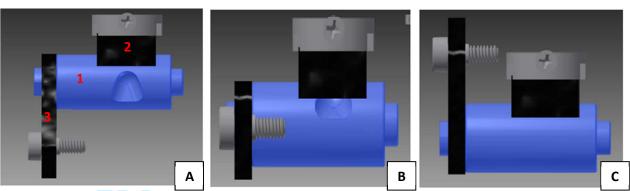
Position of the drum (1), brush (2), and rotating arm (3) during operation. Reciprocating drum in "relaxed" position (A). The drum rotating back as force is applied to the internal spring (B). Spring is fully compressed; drum cavity is exposed to seeds in seed hopper (C).
